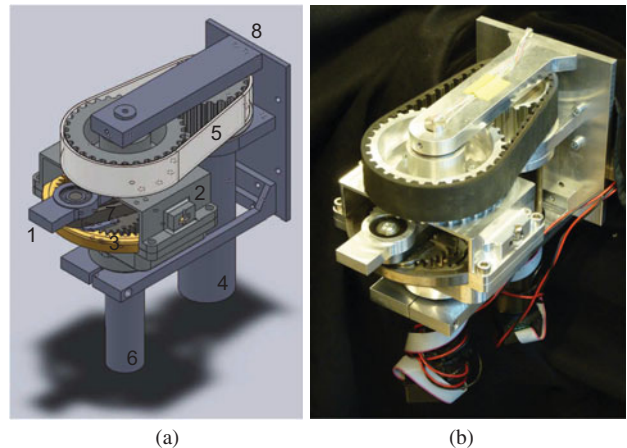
CAD view and photo of the vsaUT-II variable stiffness actuator (labels as in Fig. 2). (a) CAD drawing. (b) Physical prototype.
